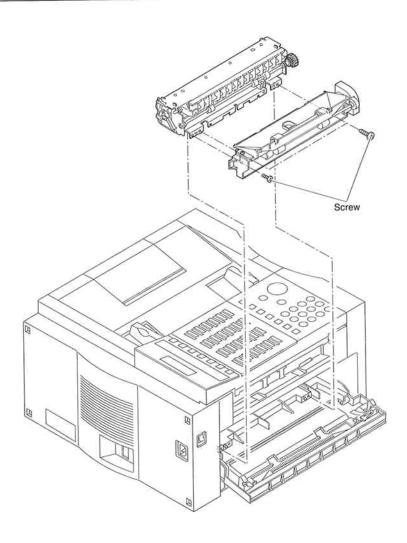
Disassembly Procedure (Fixing Ass'y)
